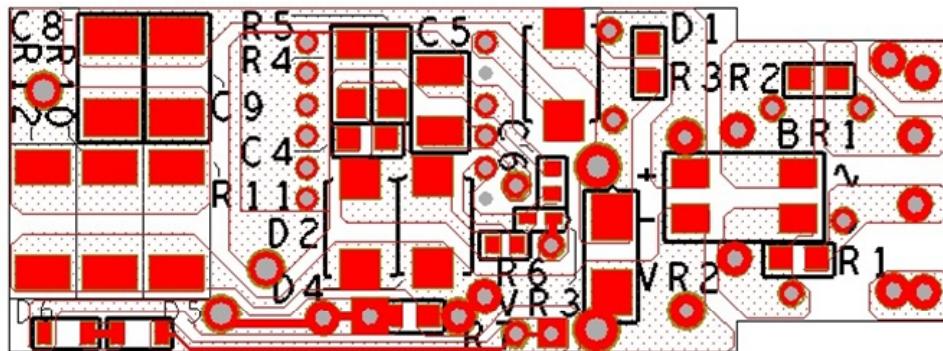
Bottom Side. Dimension 53.5 mm x 19.6 mm
